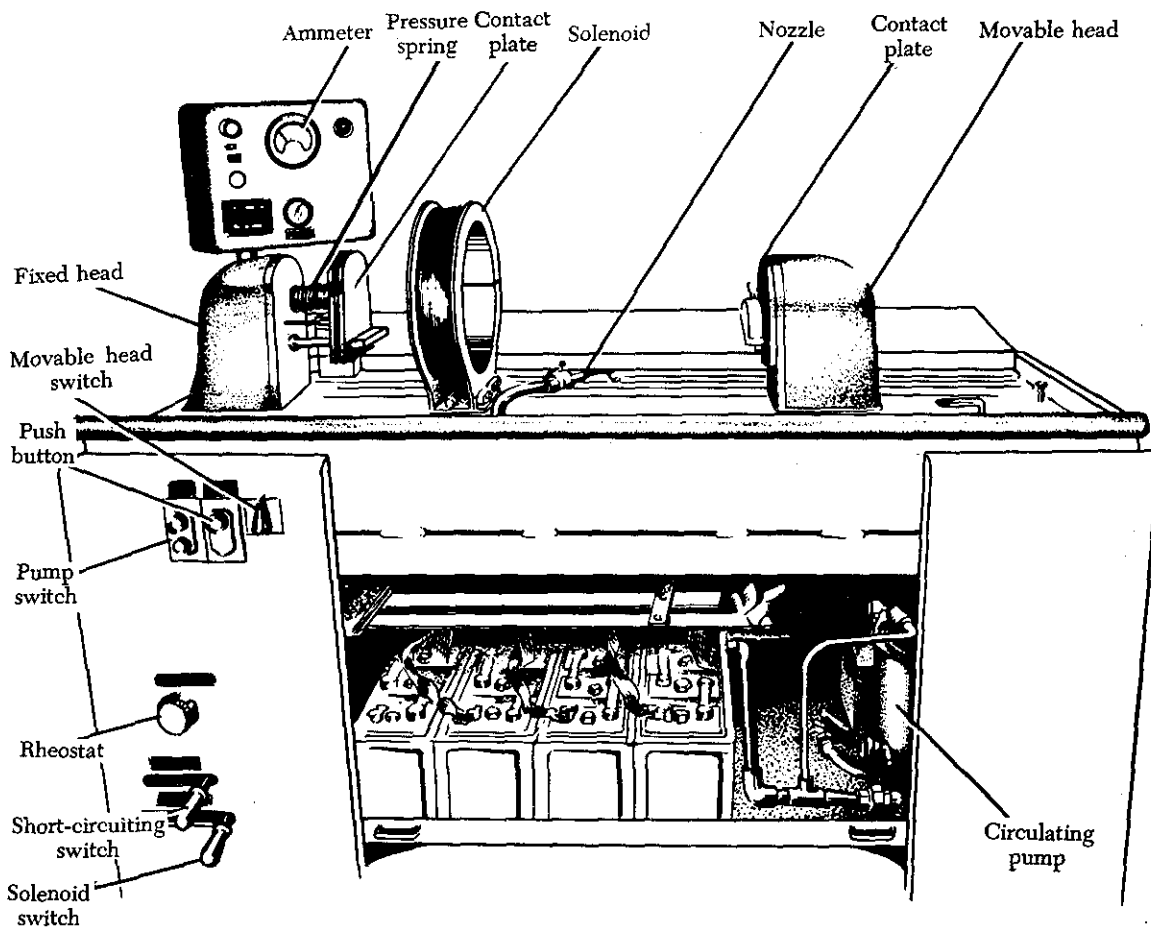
Fixed general-purpose magnetizing unit.
